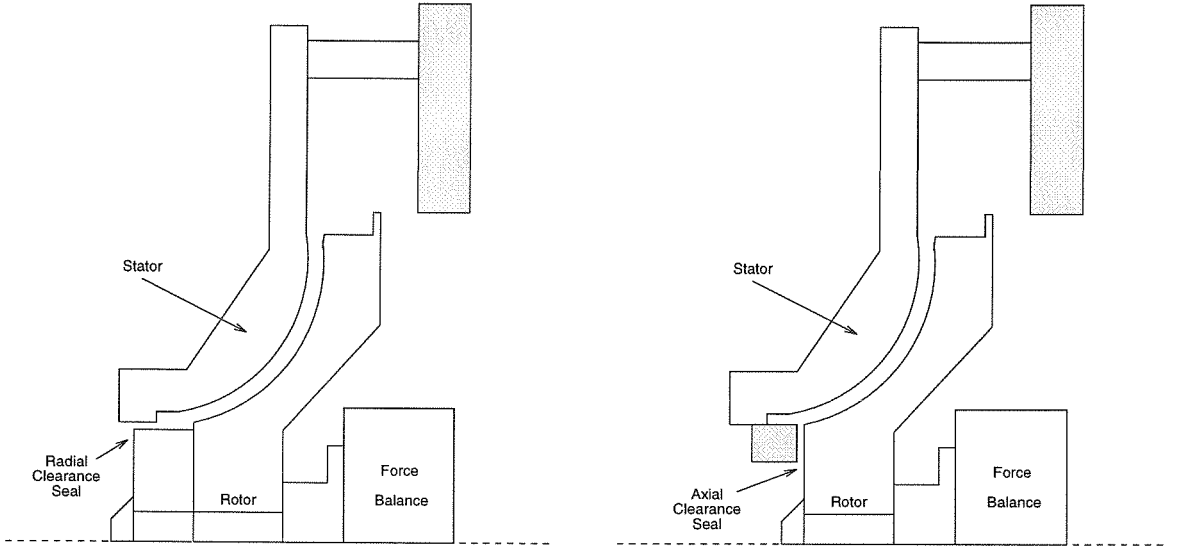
Experimental Configuration: Contoured rotor with radial clearance (left) and axial clearance (right) low pressure seal.
